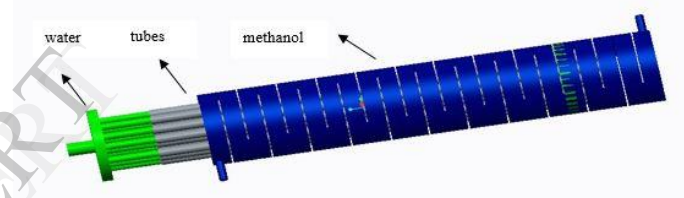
Fluid assembly model of the shell and tube heat exchanger
